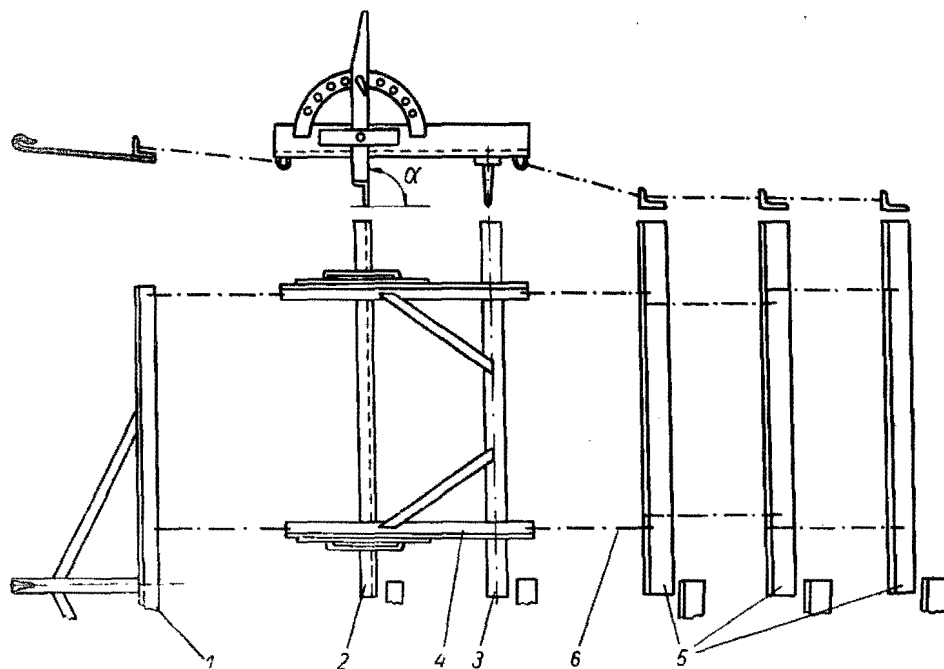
Drag with beam of varying angle and with toothed beam: 1—hitchbar; 2—adjustable beam; 3—toothed beam; 4—longitudinal beam; 5—leveling beams; 6—chains.
